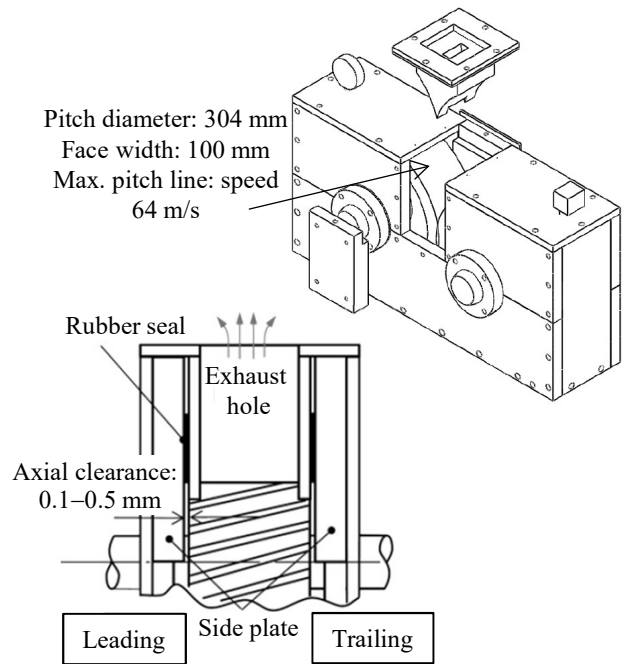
A clearance setting between helical gears and a shroud [58]
